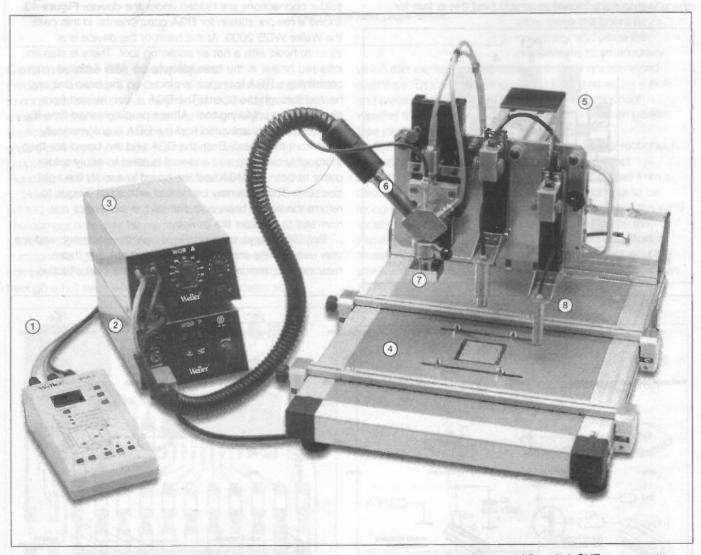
The Weller WQB 2000 BGA/QFP, an industrial solder reworking system for ball grid array and fine pitch SMT components. Difficult repair processes: desoldering, printing a new solder paste layer, component placement and resoldering are carried out on a preheated base table. Exact repositioning of the component is achieved with a vacuum pick-up nozzle that lifts and lowers the new component before and after the solder paste printing process.
